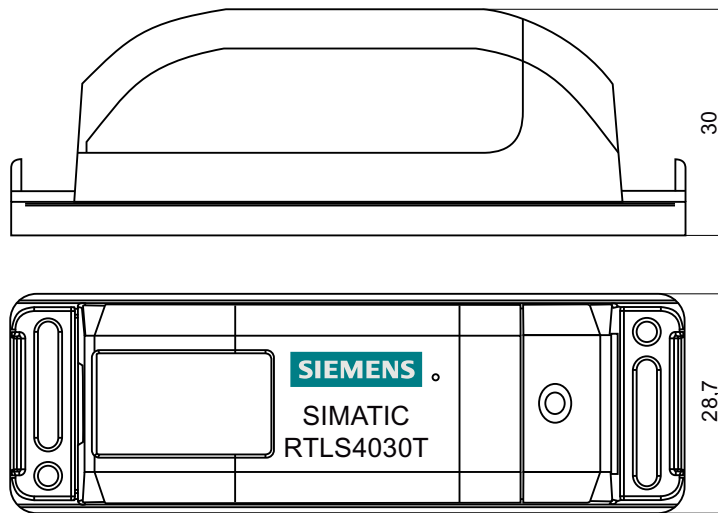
Dimension drawing SIMATIC RTLS4030T - All dimensions specified in millimeters
